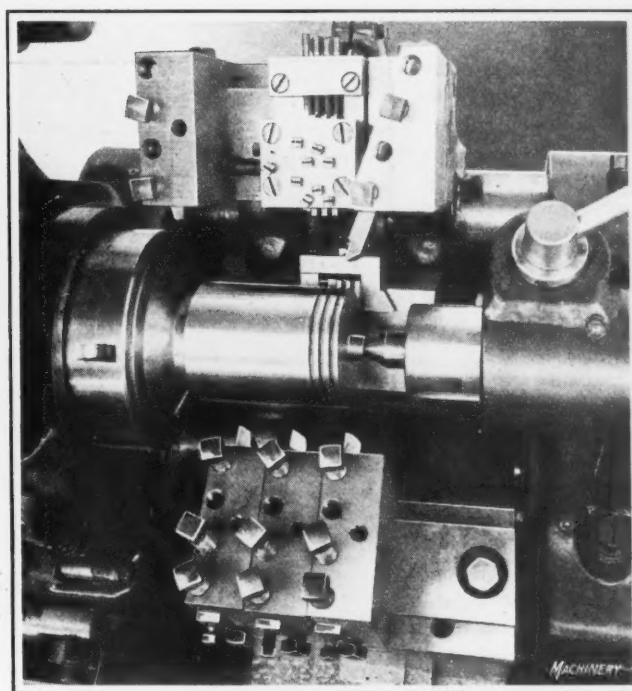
Close-up View of a Machine engaged in finishing a Cast-iron Piston
